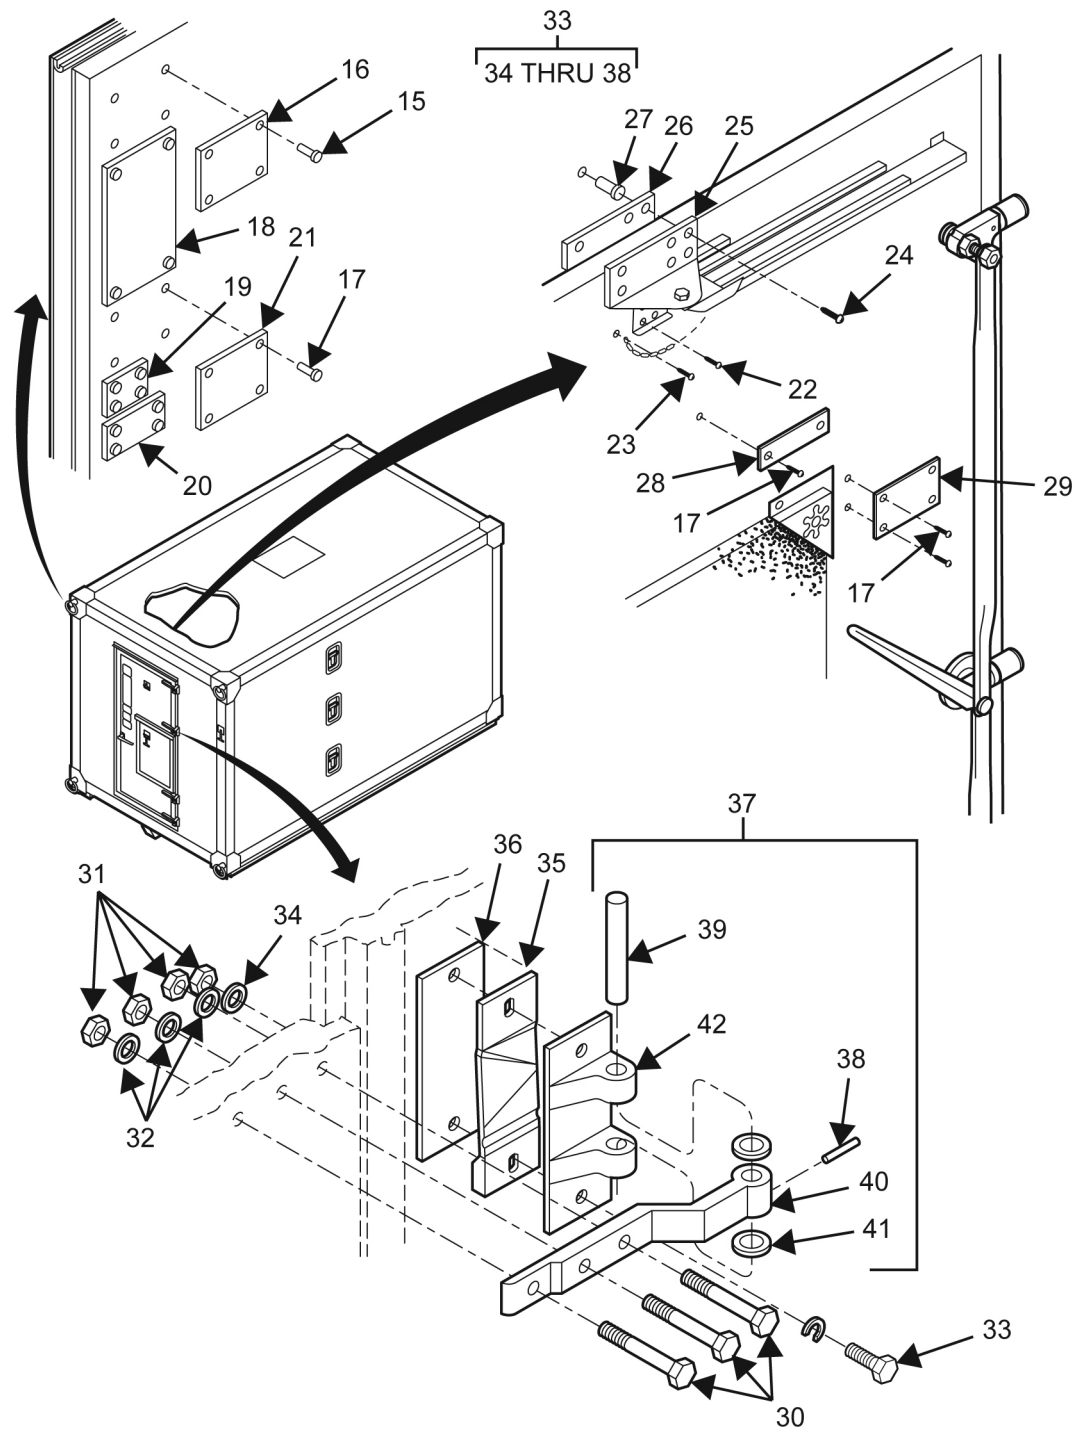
Shelter, Electrical Equipment S-280 (Sheet 2 of 3).
